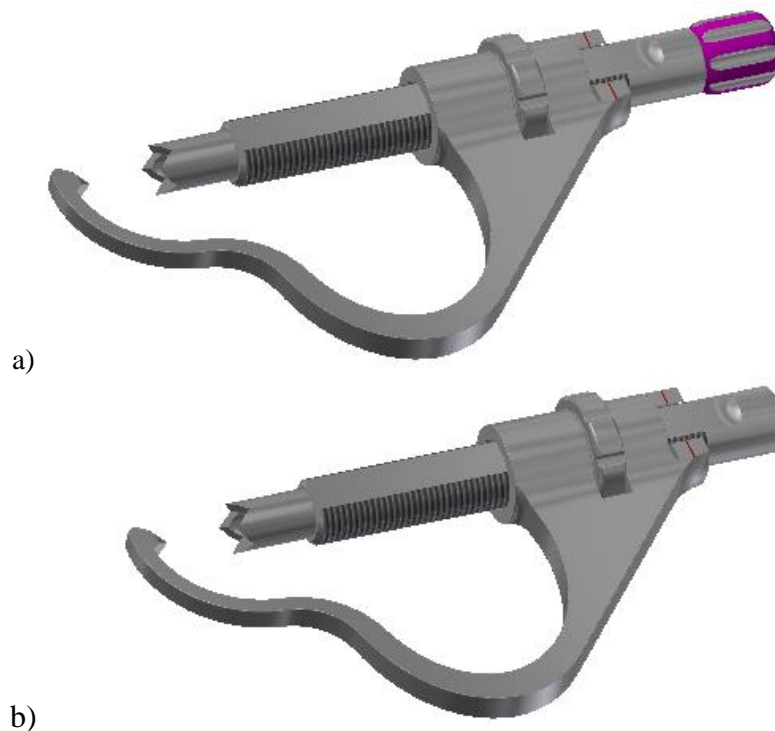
Device for reduction of finger fractures: a) with the drill guide; b) without the drill guide for insertion of screws.
